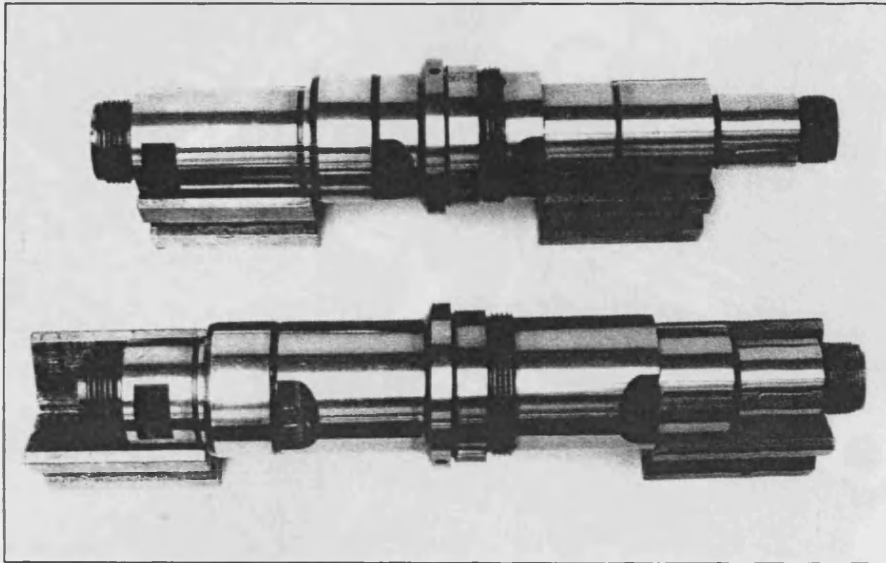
Photograph of the test shafts before fitting of the discs. Note that support bearing locations are spaced differently on the slow (upper) and fast (lower) shafts.
